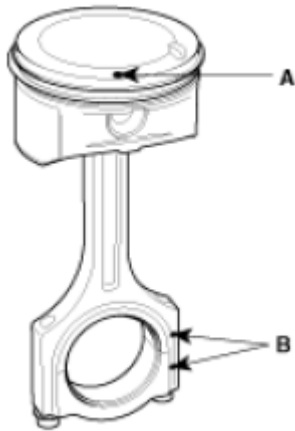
Identifying Piston Front Mark And Connecting Rod Front Mark
